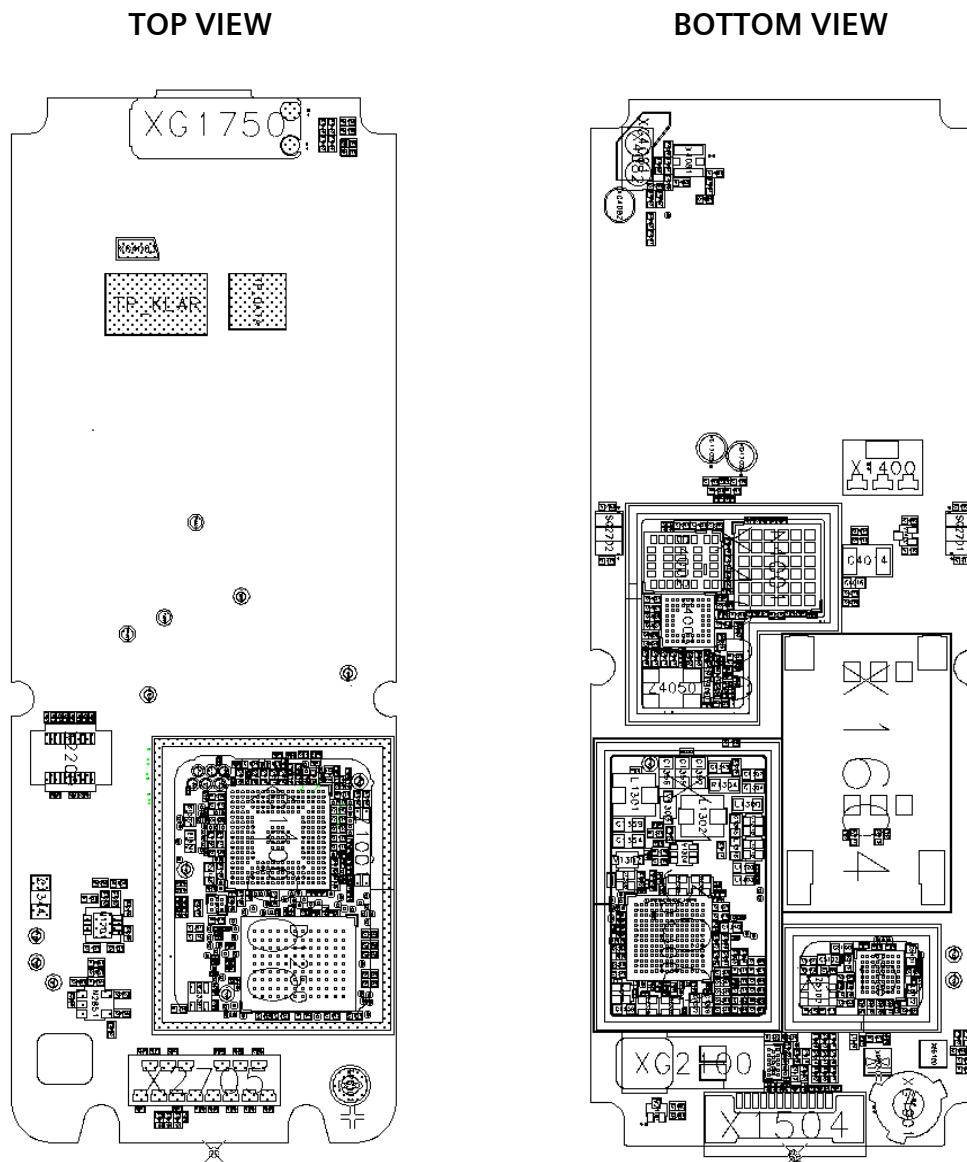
Main PCB Assembly Top- and Bottom-Side
